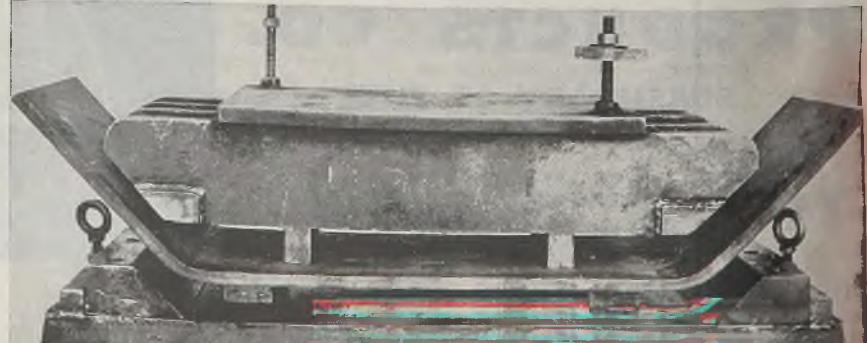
(Top, left) Forming die for air tube halves and sections of finished ducts
